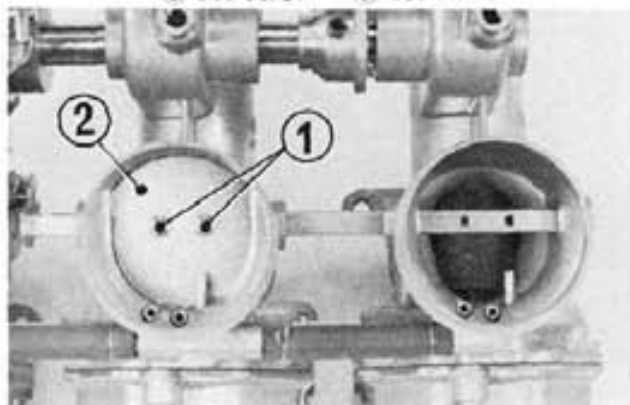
① Screws ② Choke valve ③ Tube
